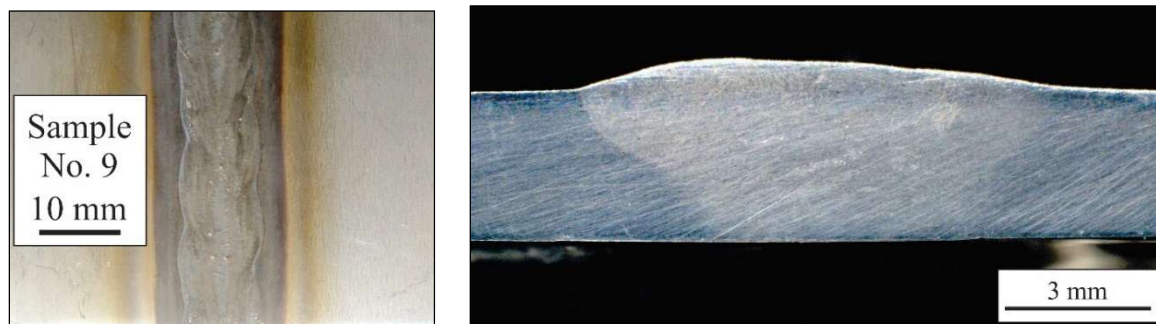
Specimen N° 9 - TAG, 210 A, filler wire 80 cm/min.
